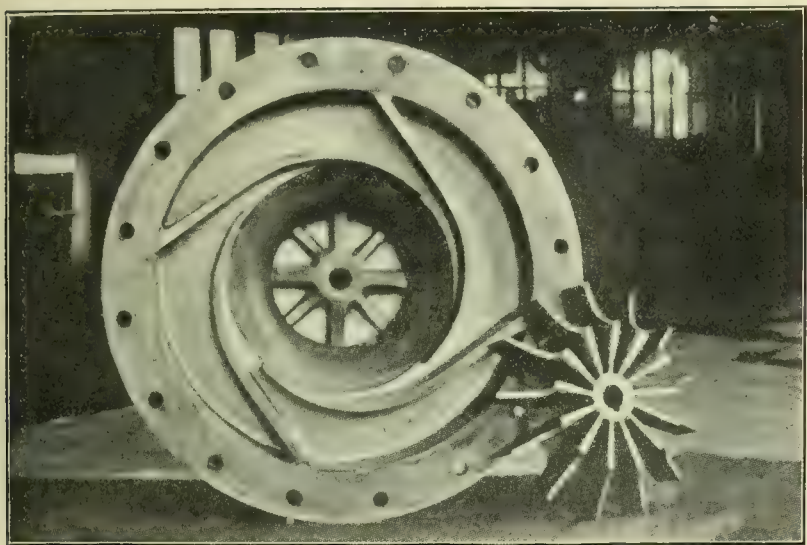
IMPELLER AND GUIDE PASSAGES, 1895 (MATHER-REYNOLDS).
